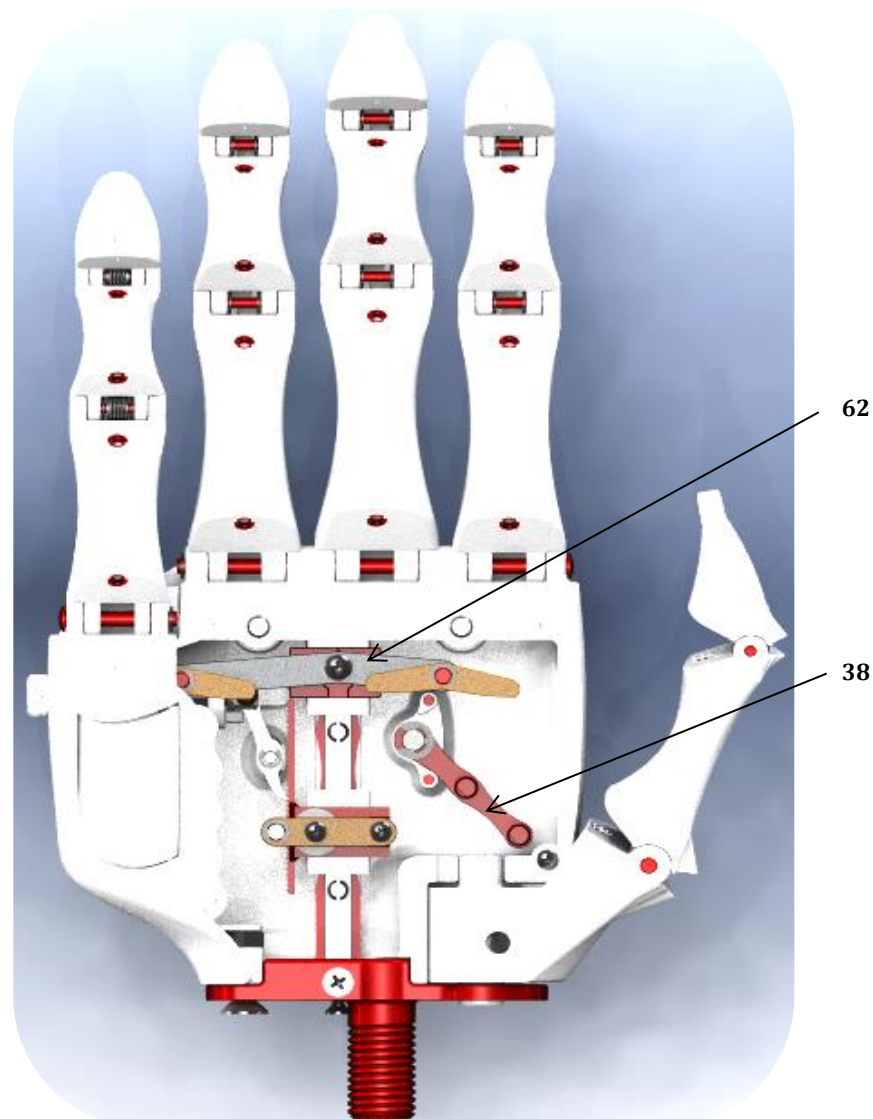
Open palmar view of the assembled prosthetic hand with its internal mechanisms
